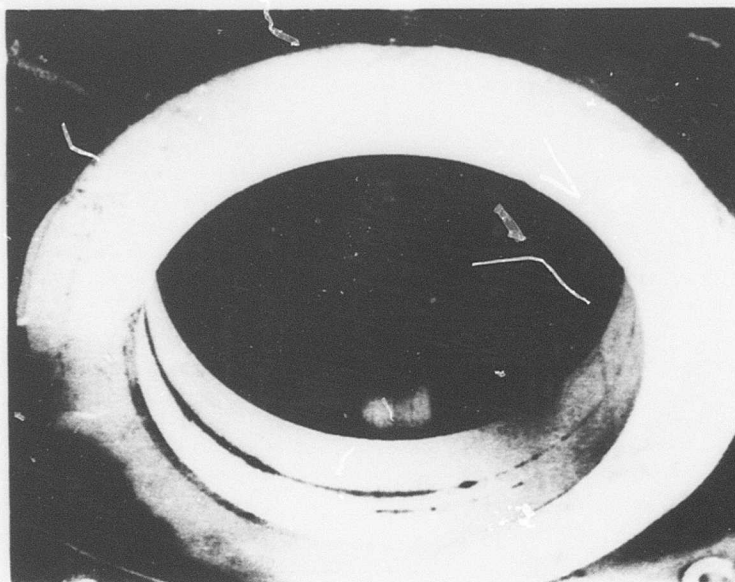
Crack in the Left-Side Accessory Bore of S/N 1 Housing.
